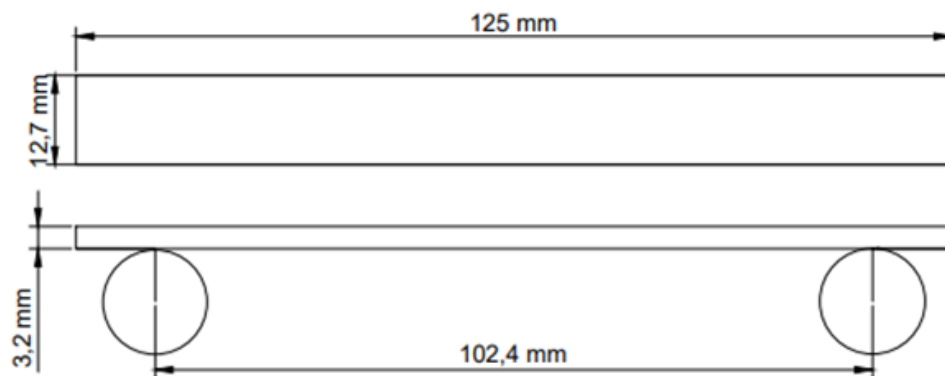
Dimensions of three point bending test specimen (ASTM D790)
